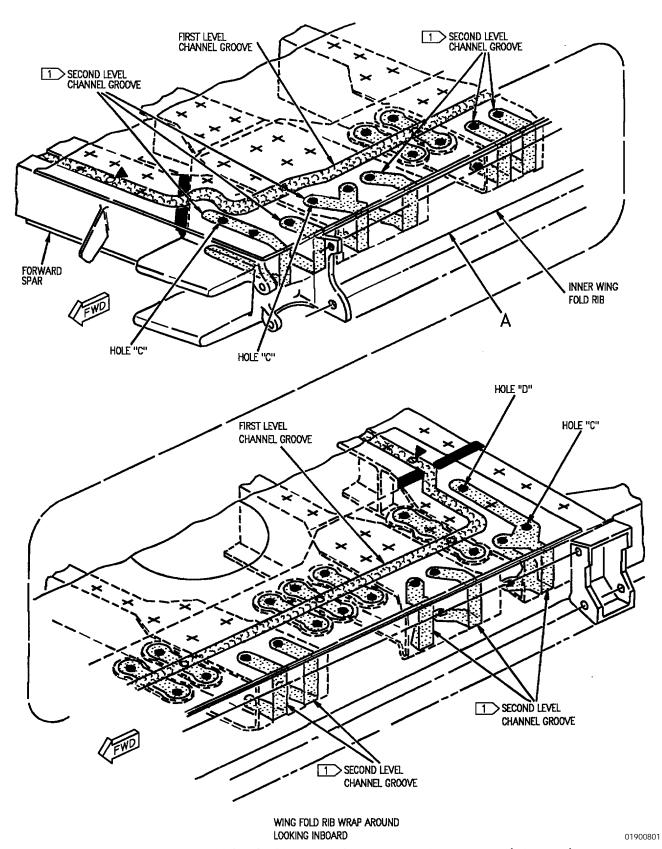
Wing Fold Rib Channel Groove Seal Injection (Sheet 1)
